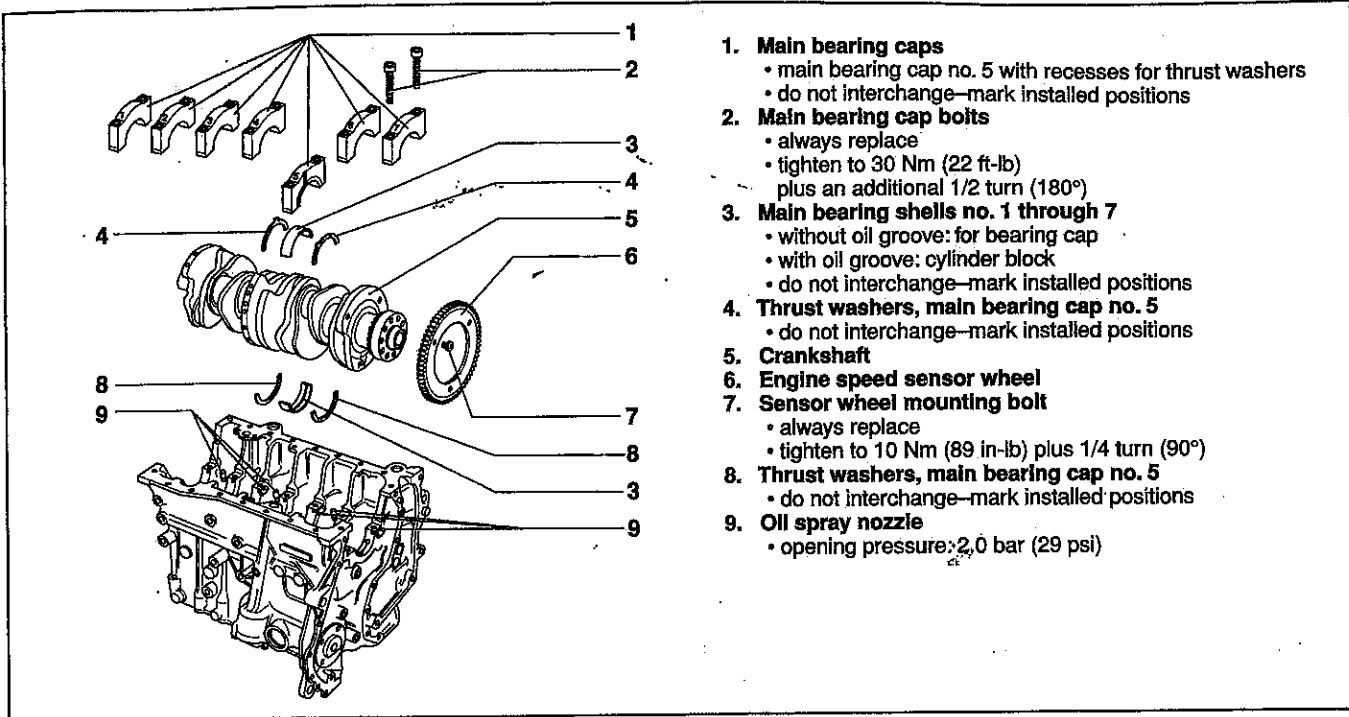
Exploded view of crankshaft and related parts for 4-cylinder engines.
